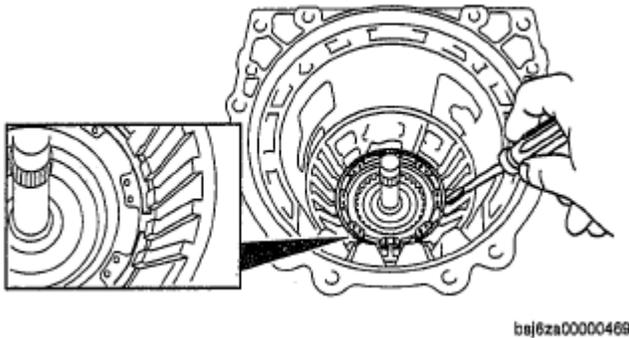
Removing Snap Ring Using Flathead Screwdriver
